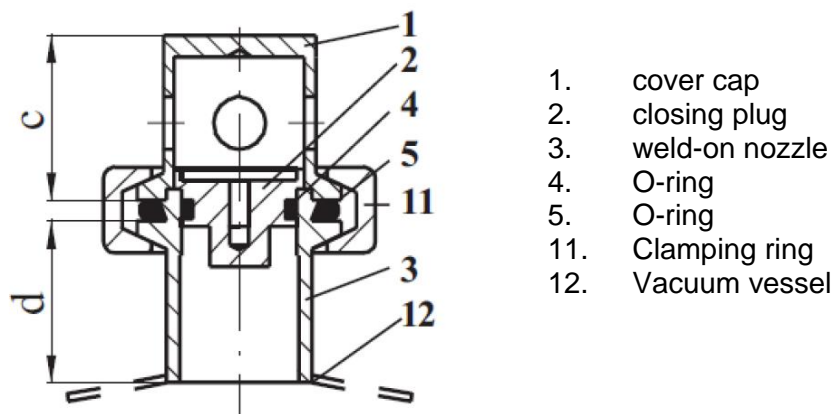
Vacuum pressure relief valve from the company Jakob Vakuumtechnik⁴.
